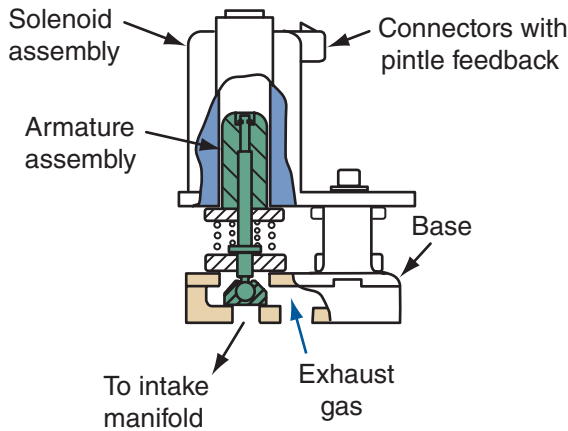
A linear EGR valve relies on a solenoid to move the pintle.
